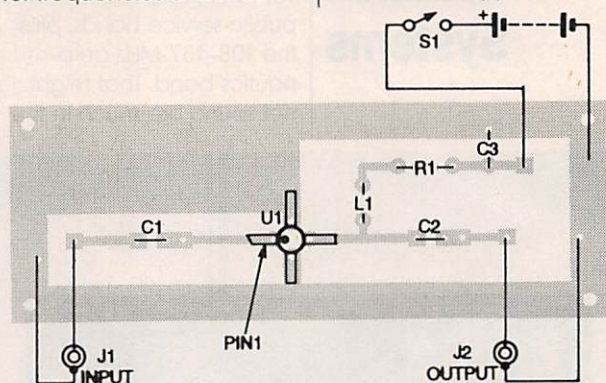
This is a parts-placement diagram for the Fig. 3 printed-circuit template. (See text for assembly options).
